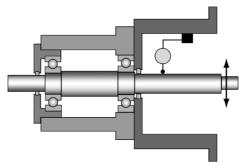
Method for Checking for Shaft Whip or Deflection
